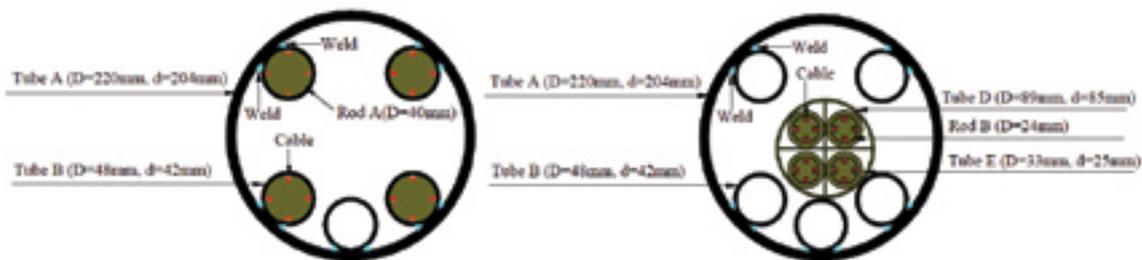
Eight heater assemblies of the secondary heater to be installed in the central tube
